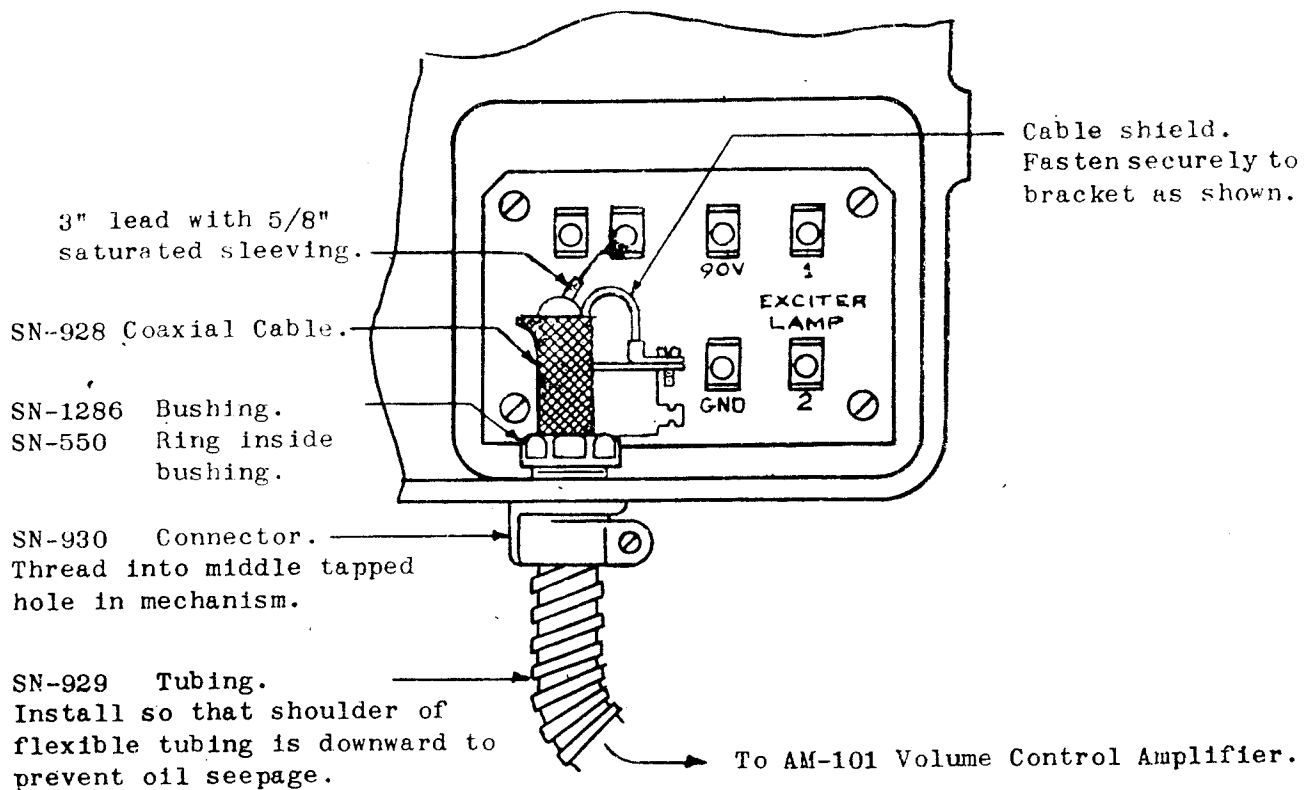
INSTALLATION OF SH-2100 IN SH-1000 SOUND MECHANISM
